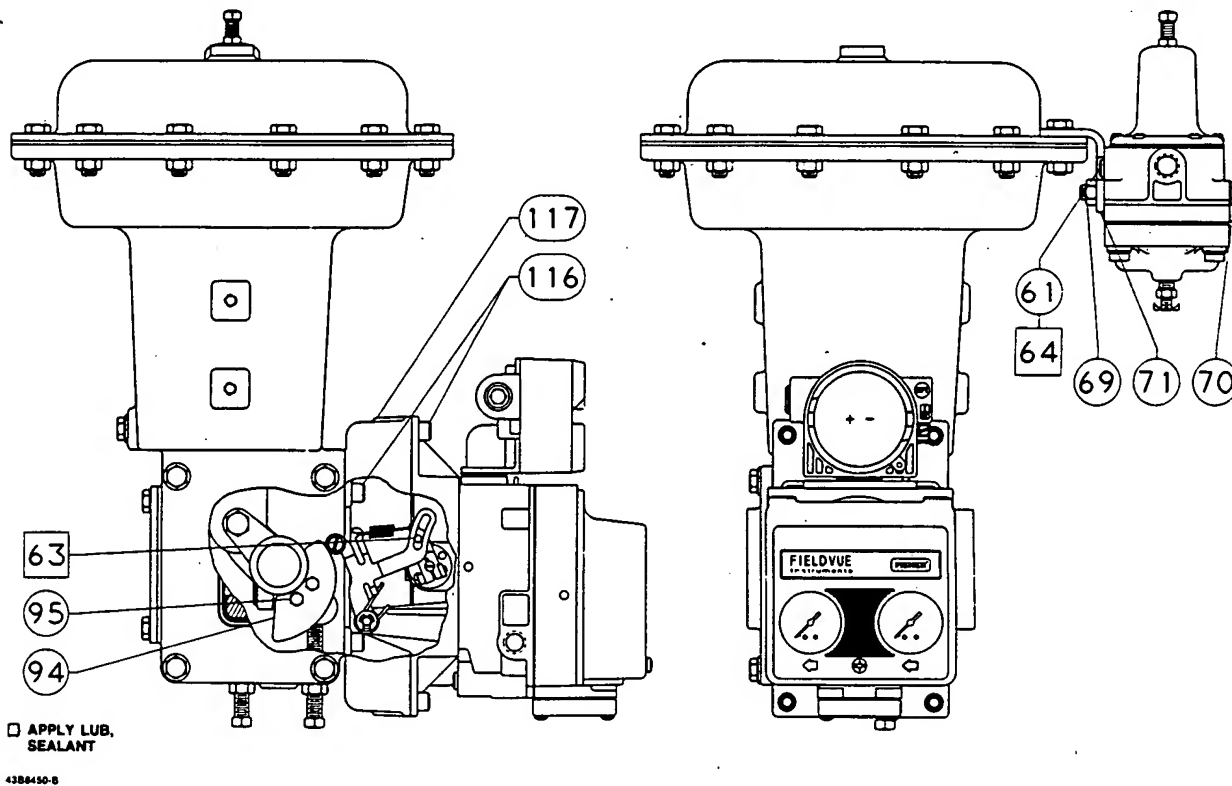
Type DVC5020 Series Digital Valve controller Mounted on Type 1052 Size 33 Actuator with Casing-Mounted Filter Regulator
